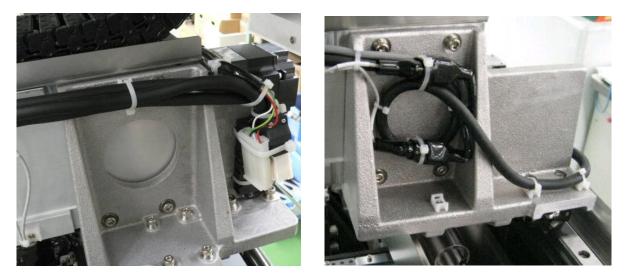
(Left: M and L Board Specifications, Right: XL Board Specifications)
